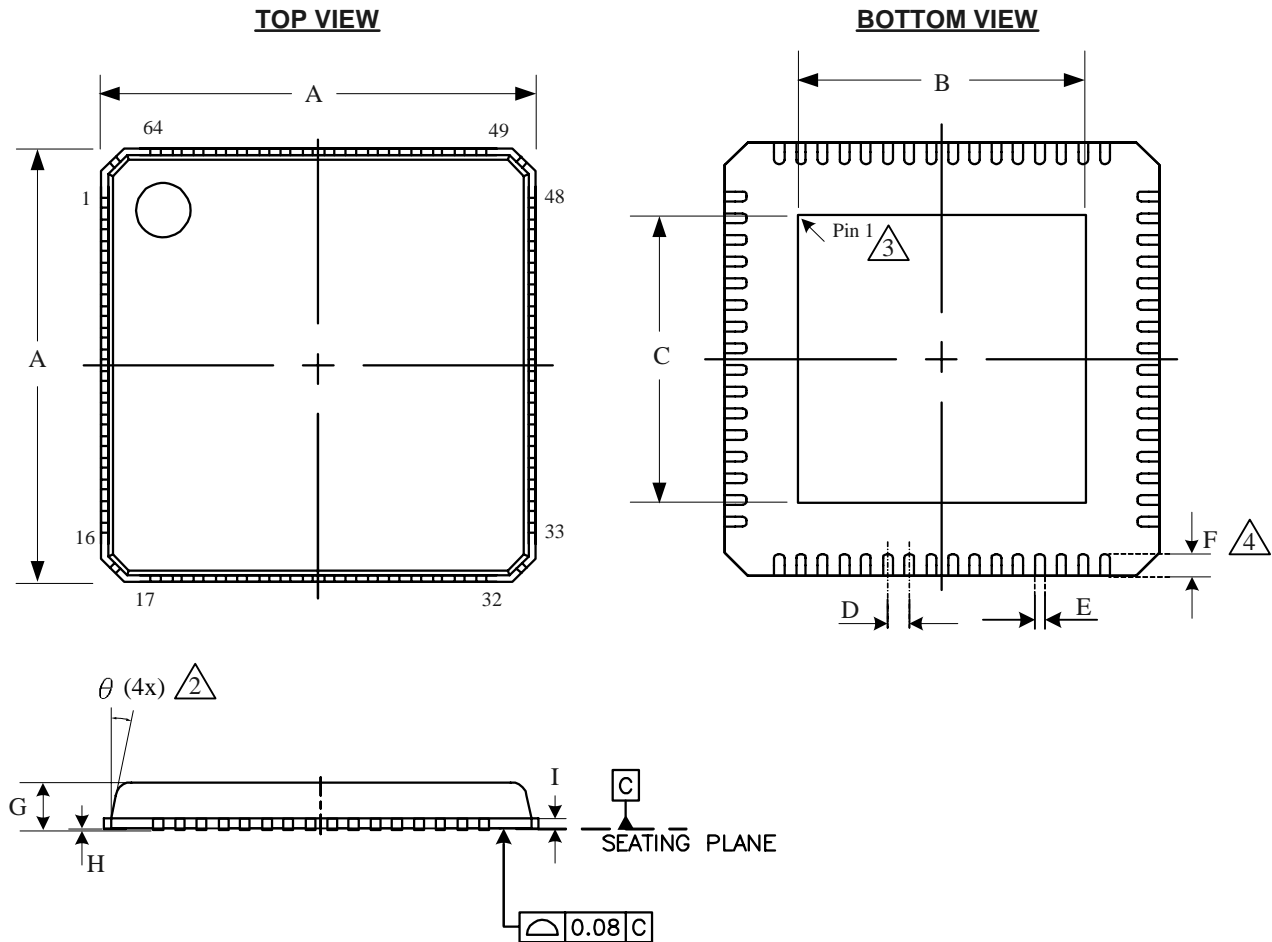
64 Pin QFN Package (8 X 8 mm)
